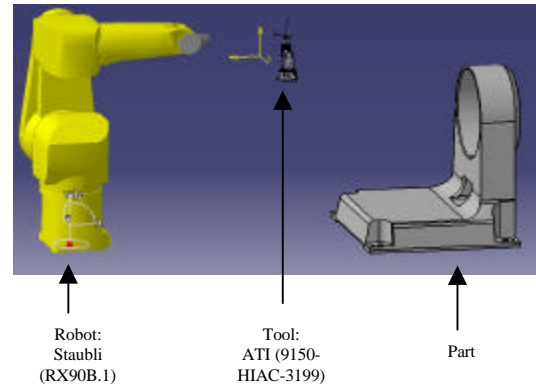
Illustration of robot, tool and part in a DELMIA environment
